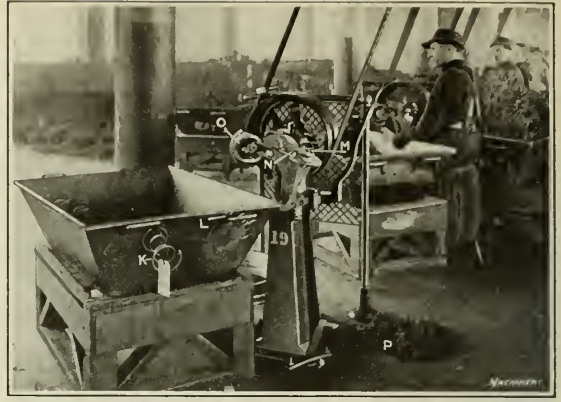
Knotting Machine that secures Ends of Wire to Spring Coils
